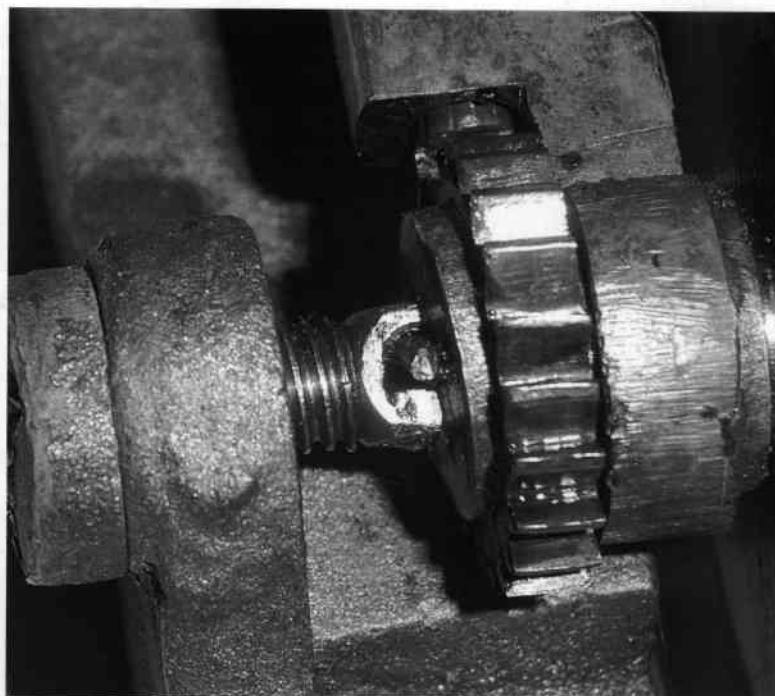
Spring bearing details; from left to right: slot in screwed bearing; locking collar; bedplate bracket; end of screwed bearing mating with end of arbor; square of arbor with pin, collar and ratchet wheel; end of winding lever.
